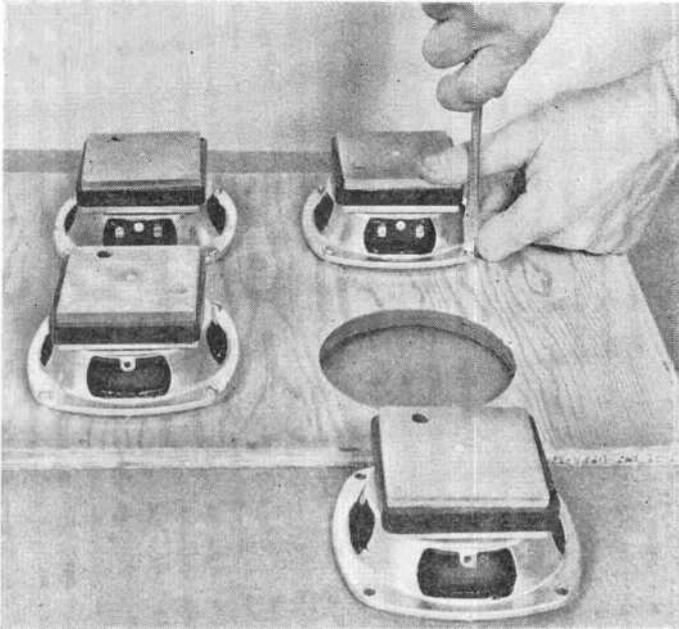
Fasten loudspeakers to speaker mounting board with #8 x 1/2" pan-head sheet metal screws.
